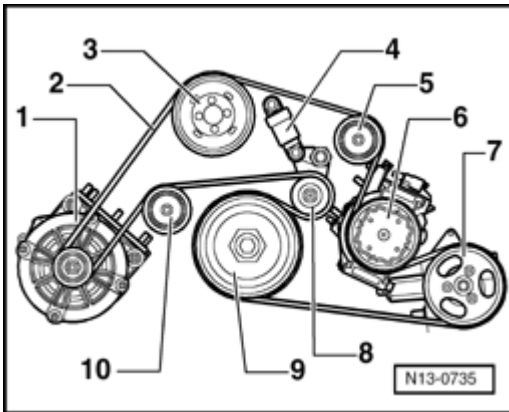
Routing Of Ribbed Belt For Engine Code BAP
